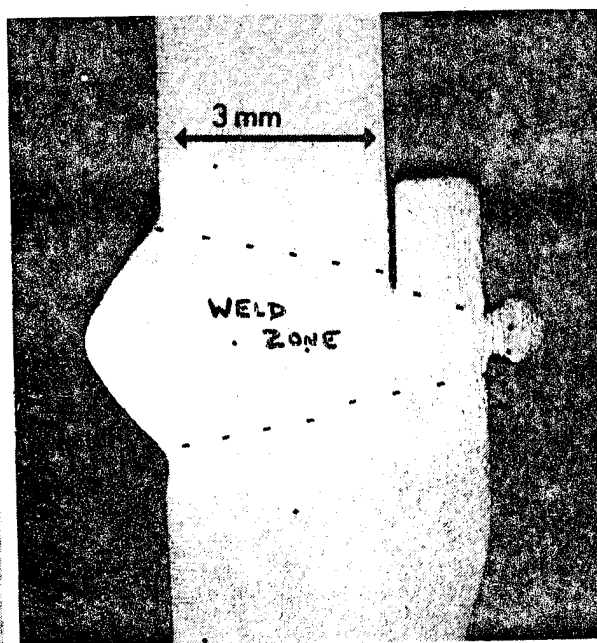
The internal surface of a Ti6Al4V propellant tank after EB welding. The failure analysis revealed weld overpenetrations and the release of weld splutter particles which were
